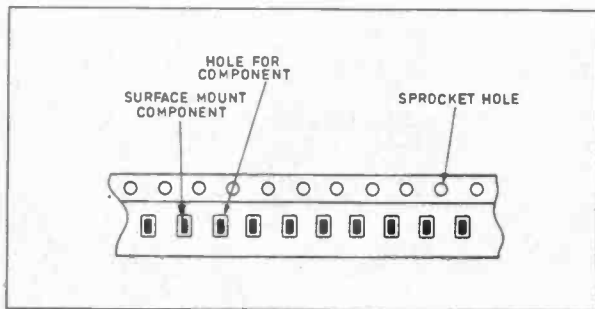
A component tape, a plastic film covers the component and is removed as they are required for placement by the pick and place machine.
